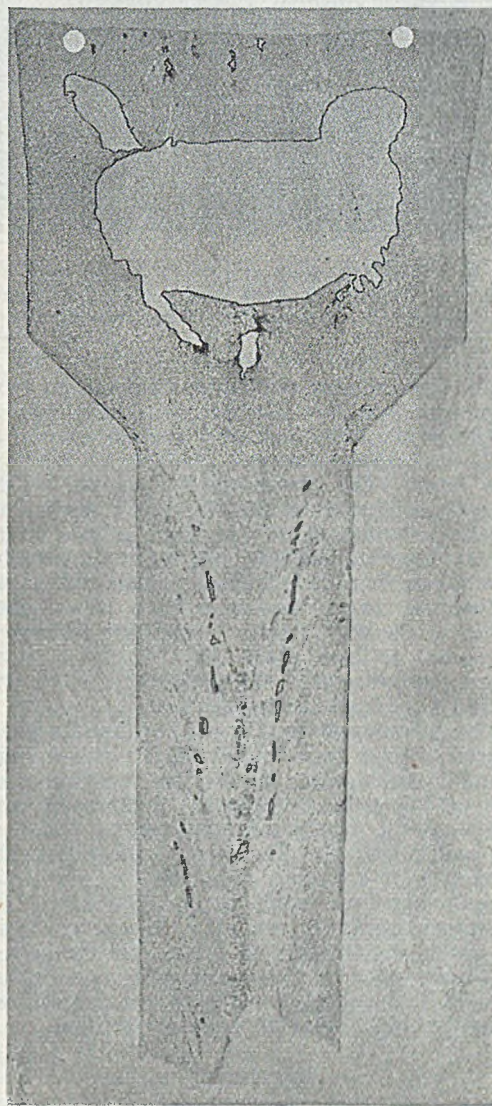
FIG. A.—Sulphur Point off a Steel Casting drained after 10 min., with Cavities Outlined in Ink. Sample cast Vertically with a Bottom Runner and Top Head.
